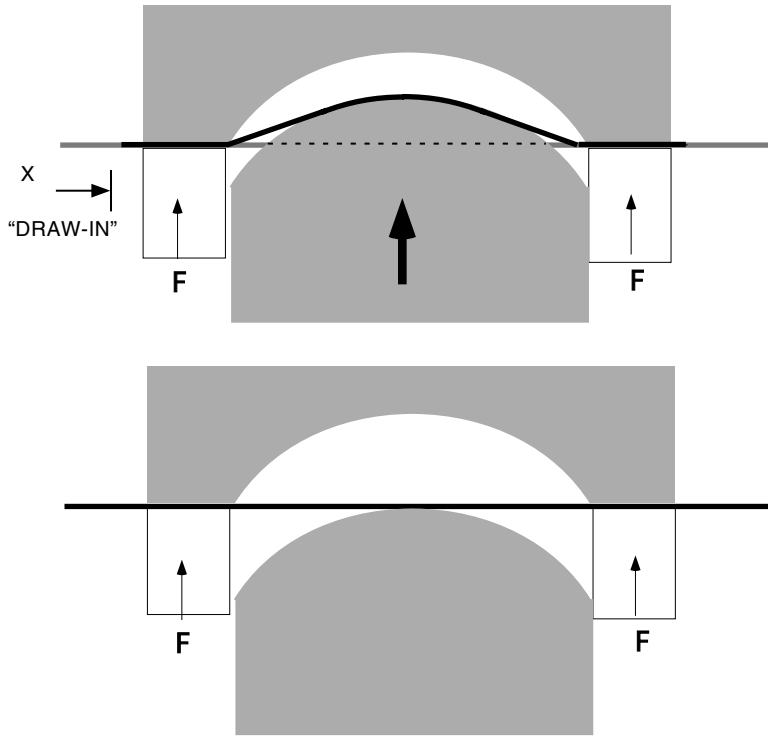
Simple draw forming with a frictional blankholder. As the tools move together, the sheet is drawn in an amount Δx .
